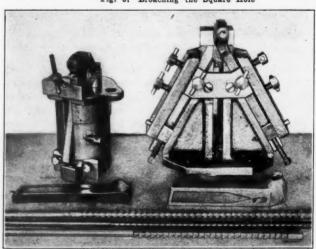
Fixtures used in broaching Straight and Off-set Tool-holders
